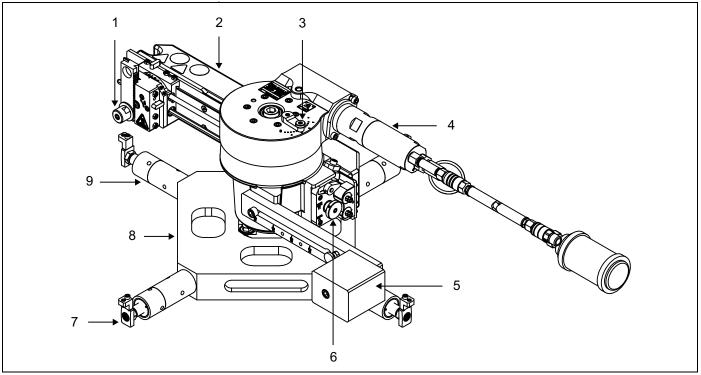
FF5300 ID CHUCK ASSEMBLY
